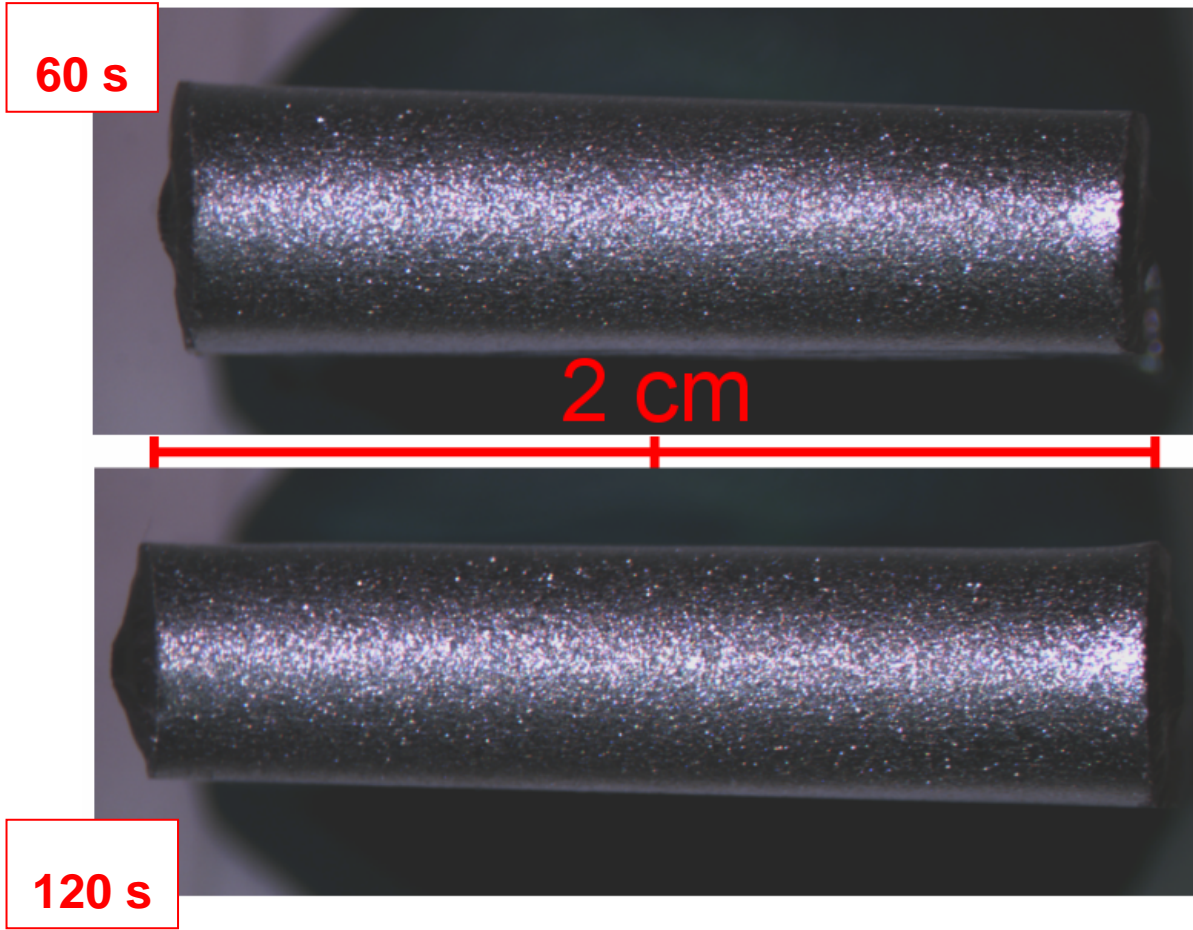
Galvanized samples after 180° bending test to assess the coating quality.
